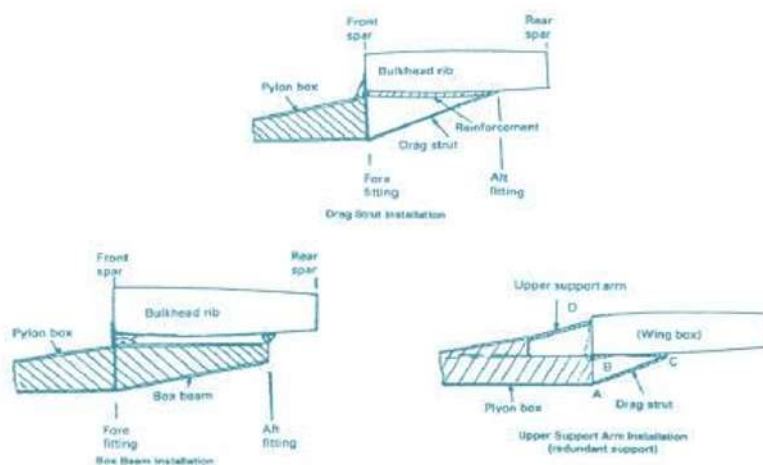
Engine pylon attachment Flight Control to Wing Attachment
